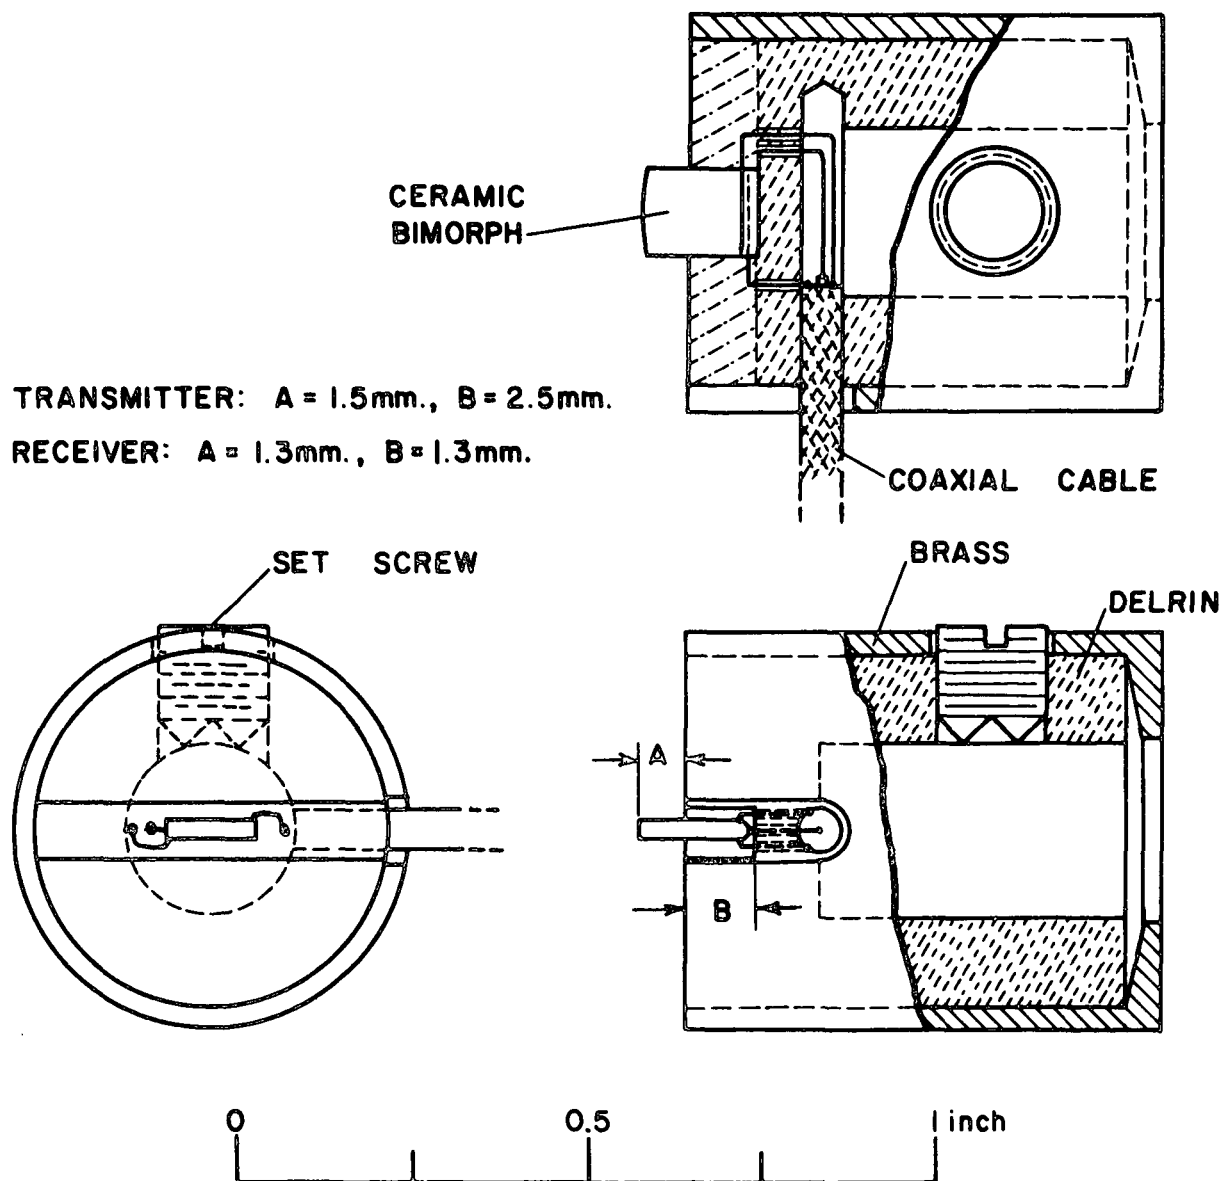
Mechanical drawing of the transducers used in the robotic tester.
